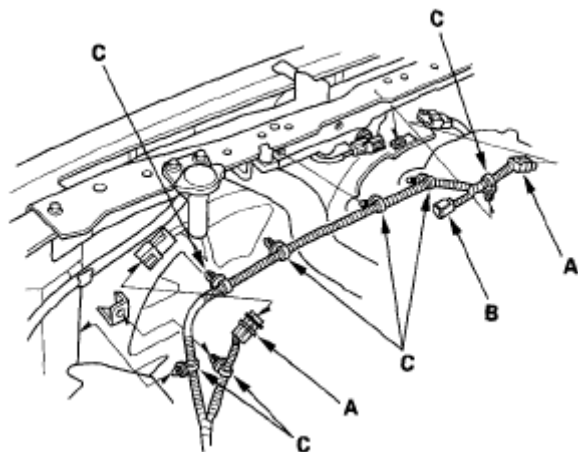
Connecting Fan Motor And Hood Switch Connectors
